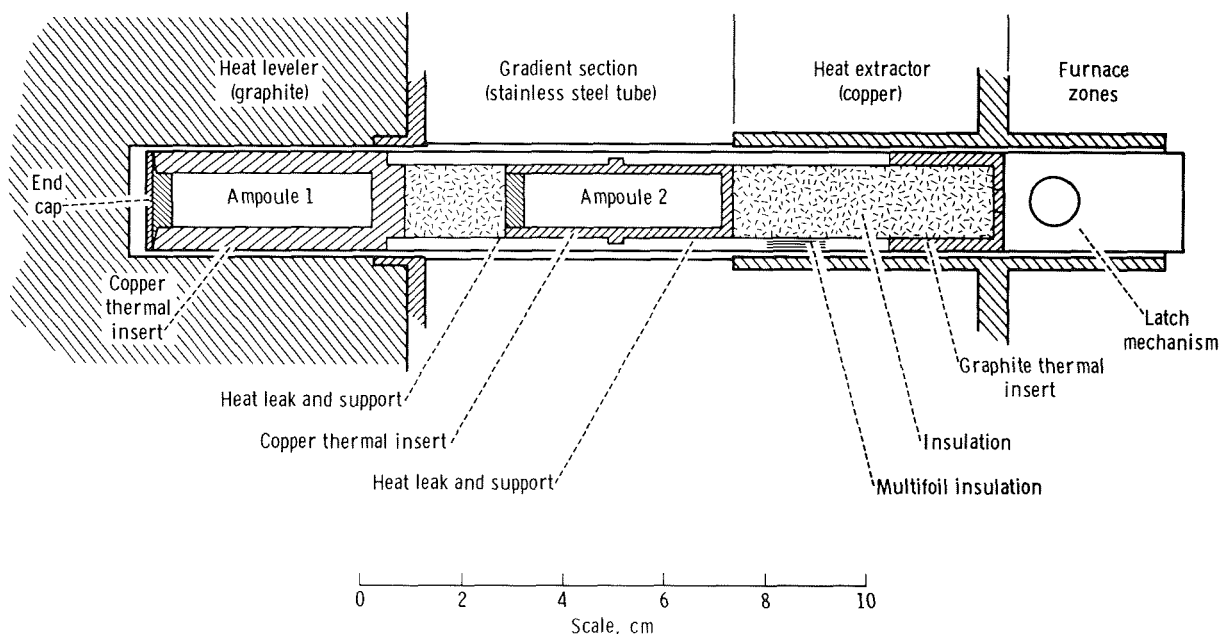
Multipurpose furnace typical cartridge assembly.
